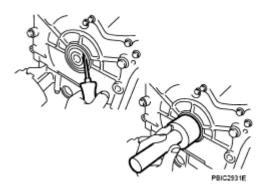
Removing Front Oil Seal Using Tool Courtesy of NISSAN MOTOR CO., U.S.A.
